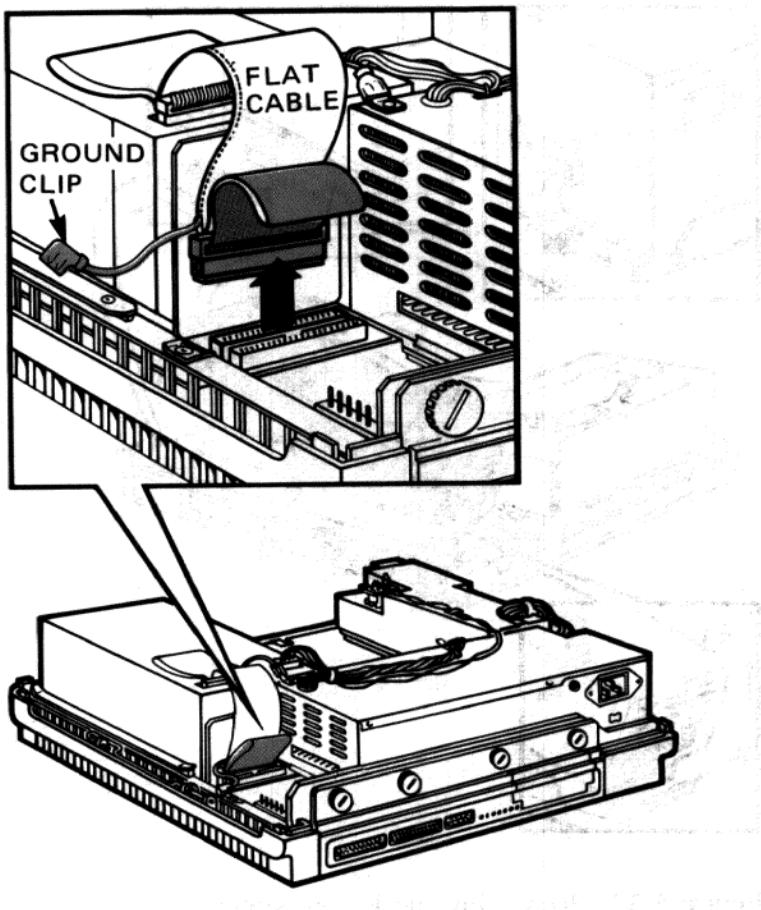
Unplugging Diskette Drive Flat Cable(s)
